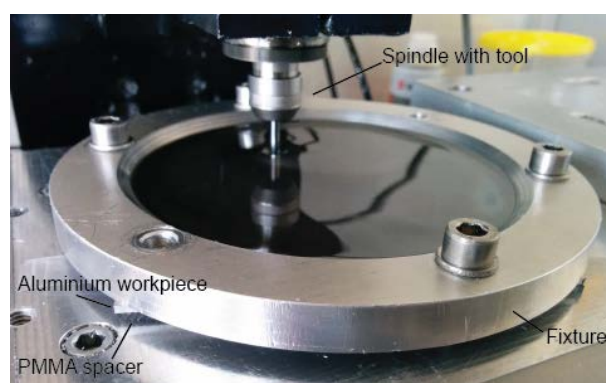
Photography of the micromilling setup showing milling of a master insert.
